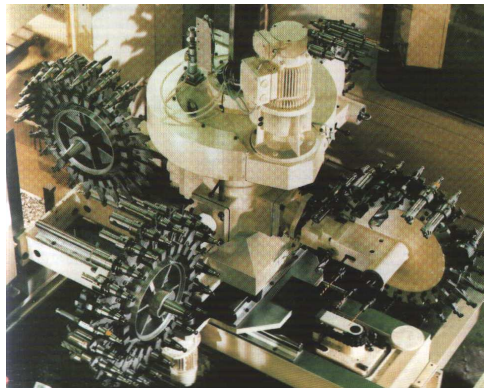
Single NC machine cell with two main tool stores a) cell layout:
